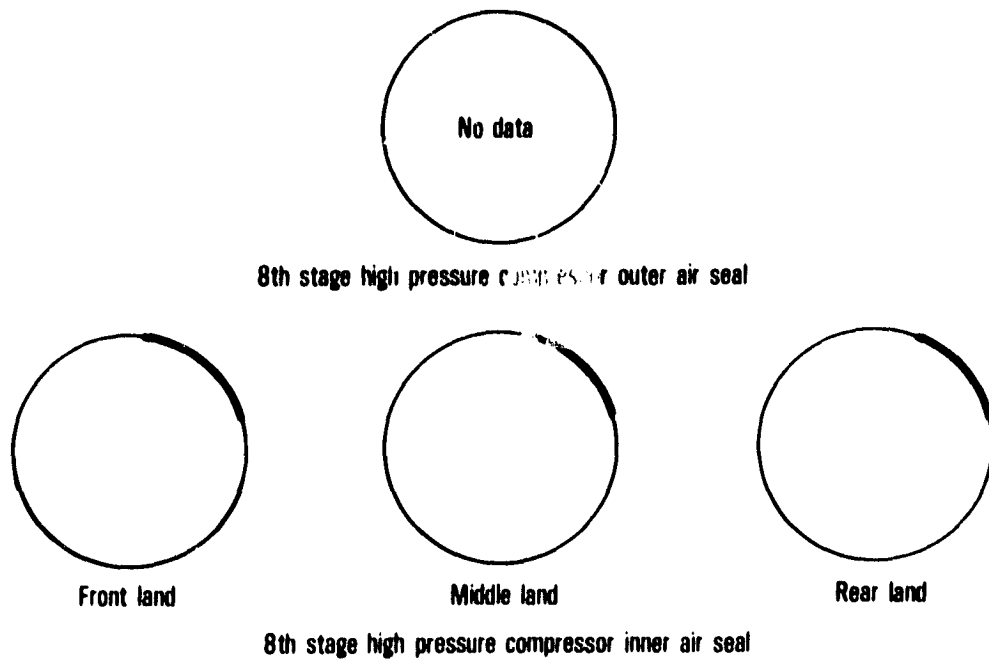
Teardown Wear Patterns (Rear View); Eighth-Stage High-Pressure Compressor Outer and Inner Air Seals. (J23976-8)
